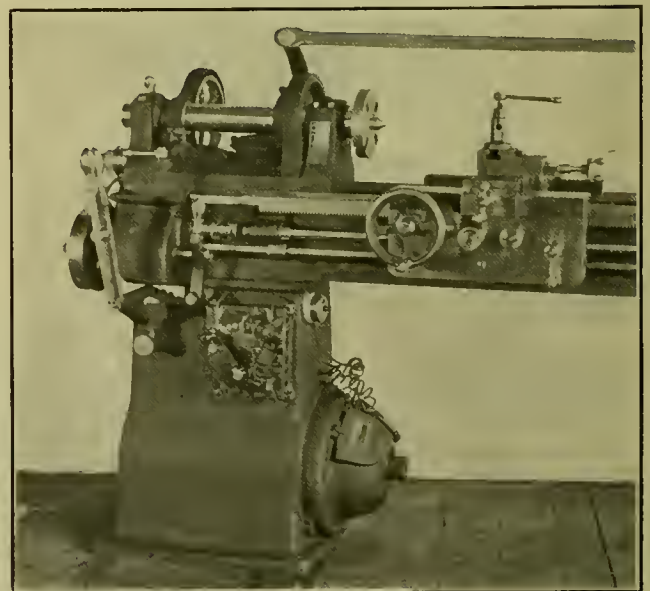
INTERESTING NEW DESIGN OF GEARED VARIABLE-SPEED, ENCLOSED DRIVE FOR A LATHE WITH CONSTANT SPEED MOTOR.—FLATHER & COMPANY.
